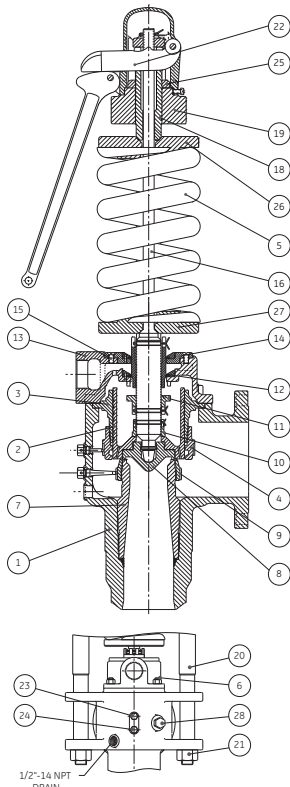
1700 Maxiflow Safety Valve – Welded Inlet
